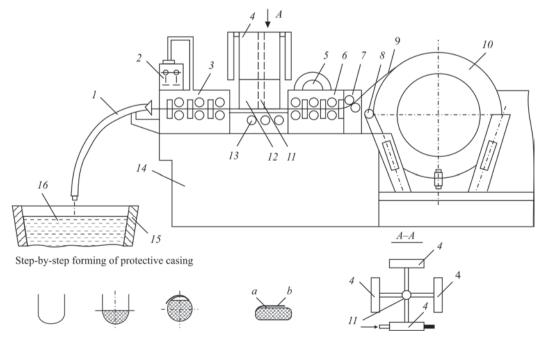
Technological complex of ladle treatment of melts using flux-cored wires: 1 - guide; 2 - control panel; 3 - forming-siz-ing stand; 4 - measuring hopper system; 5 - electromechanical group drive; 6 - forming stand; 7 - guide rollers; 8, 9 - tension device; 10 - decoiler with winded strip; 11 - rotating turret; 12 - protective casing; 13 - support rollers; 14 - frame; 15 - metallurgical capacity; 16 - melt; a, c - strip flanges overlapping
